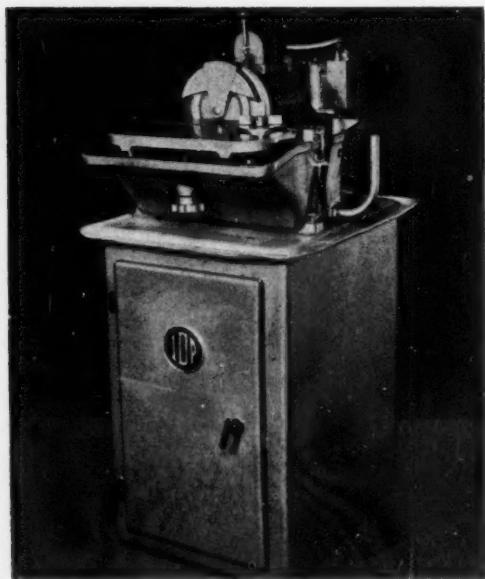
Prototype Neven GF2 Mark V Grinding Machine, with Oscillating Wheel-head, for Carbide Tools
